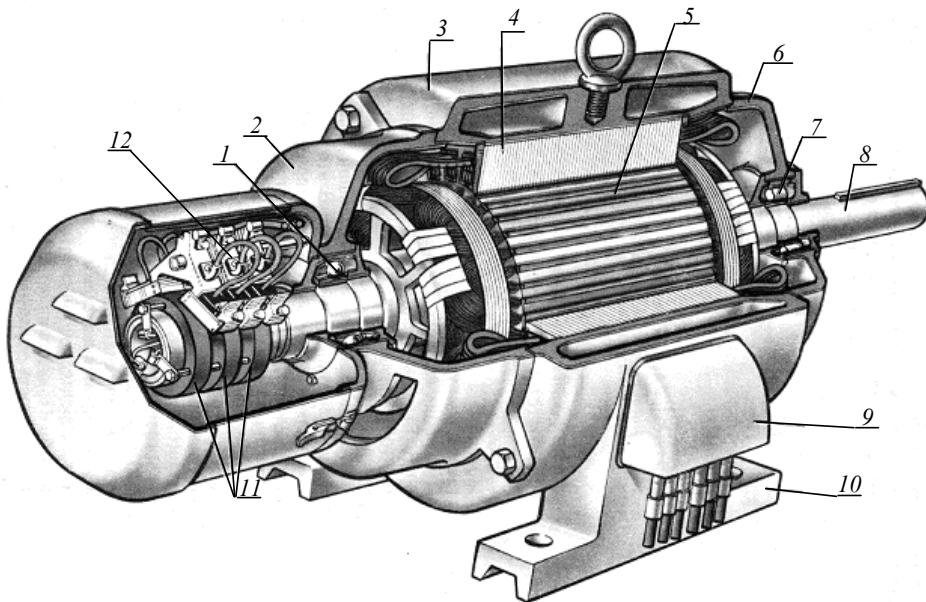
A three-phase wound-rotor asynchronous machine: 1 and 7 – bearings, 2 and 6 – end shields, 3 – frame, 4 – stator core with winding, 5 – rotor core with winding, 8 – shaft, 9 – terminal box, 10 – feet, 11 – slip-rings, 12 – current collecting set
